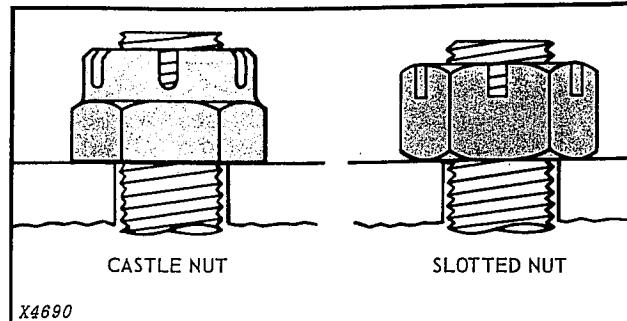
, Fig. 42 — Castle And Slotted Nuts
